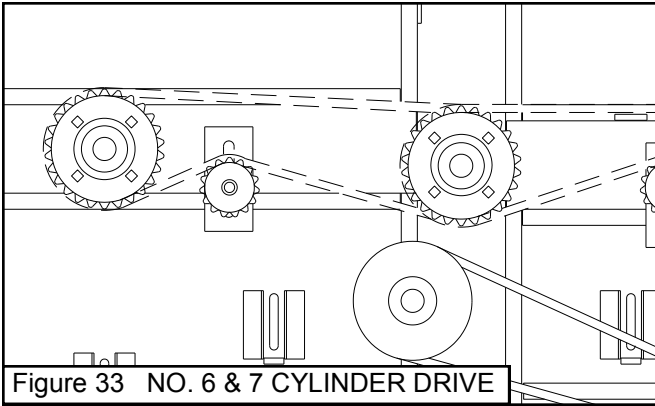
NO. 6 & 7 CYLINDER DRIVE
